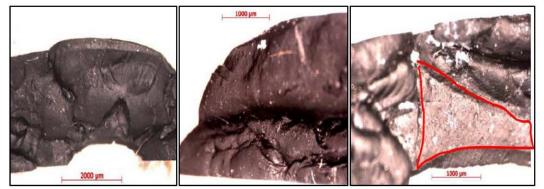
Three stages of fracture surface morphology (stereo).
